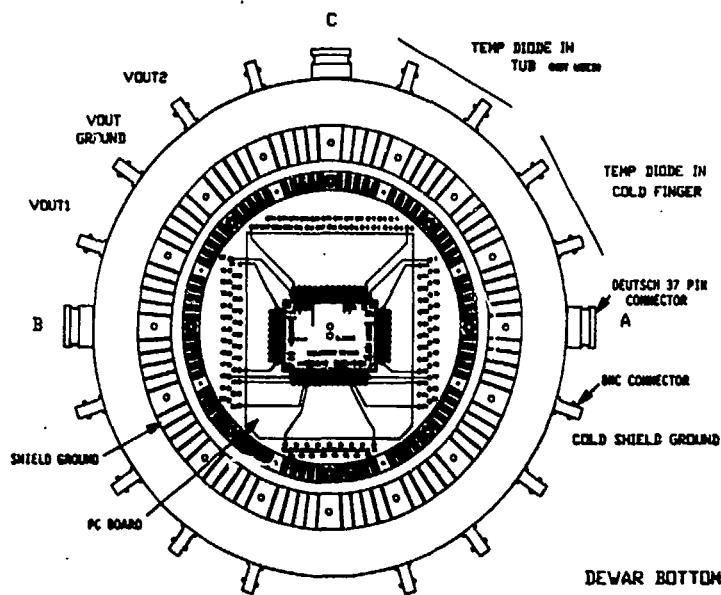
Dewar cross section in plan view, showing printed circuit board and external electrical connectors.
